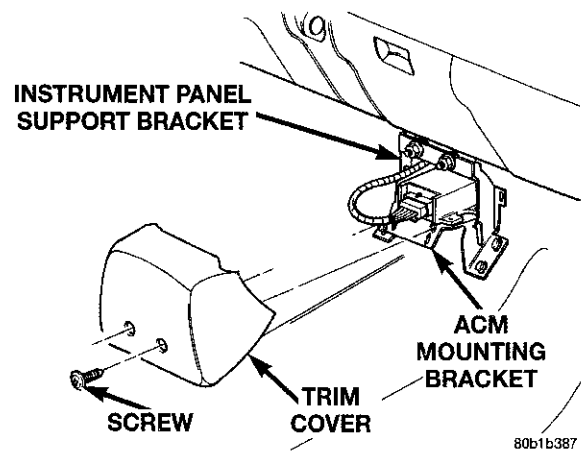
Airbag Control Module Trim Cover Remove/Install
